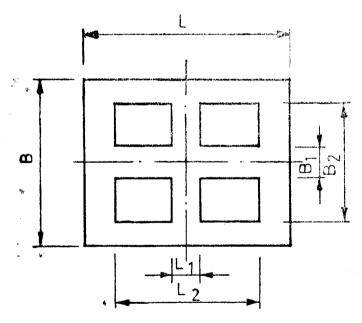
1 - Diagrammatic arrangement of openings and entry widths applicable to the three sizes of pallets (see Table 1.3)
